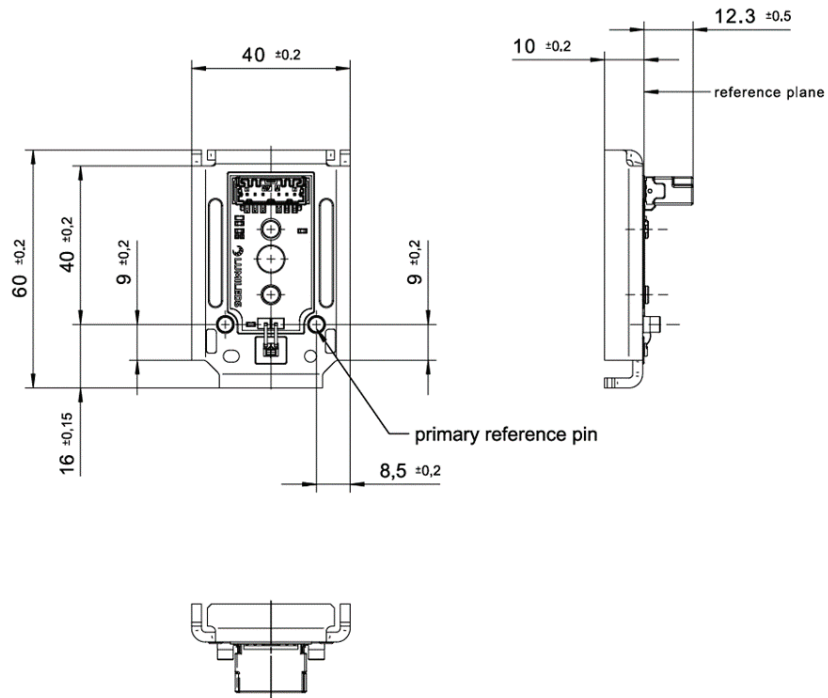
Mechanical dimensions in mm of the LUXEON Go 1x2 master module with heatsink type A
